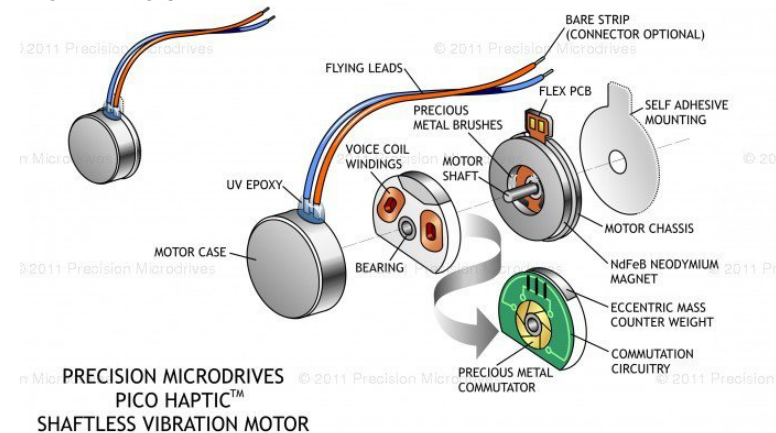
Image showing the casing assembly of the vibration motor. Source : <http://www.precisionmicrodrives.com/vibrating-vibrator-vibration-motors/pancake-shaftless-coin-vibration-motors>
